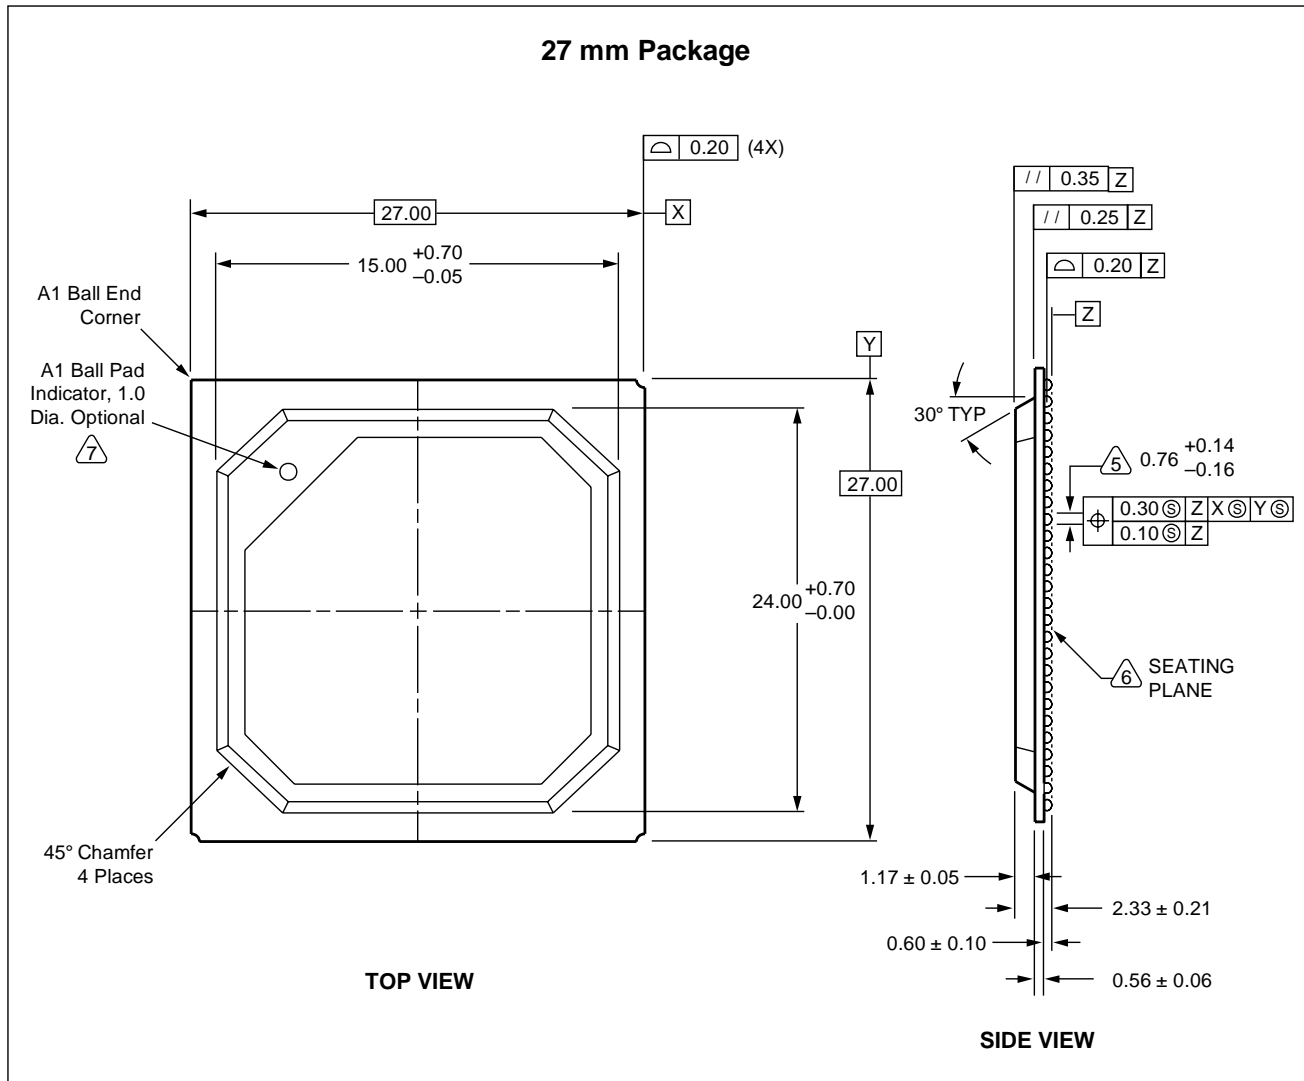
RS8228 27 mm Mechanical Drawing (Top and Side Views)
